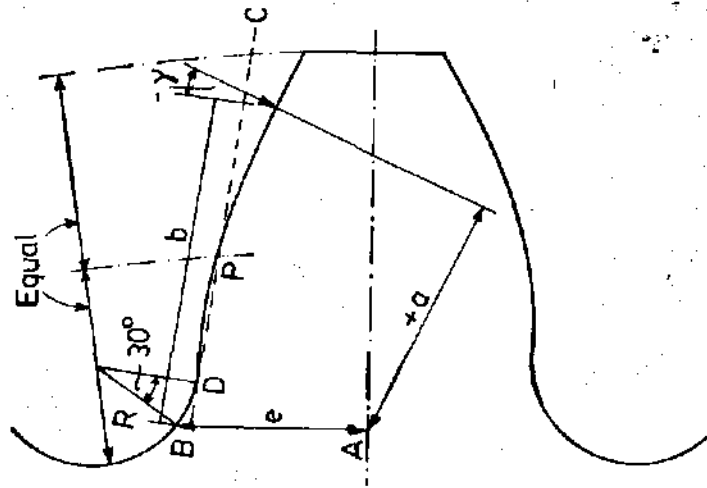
Equivalent Flat-Sided Projection Constructed from Gear Tooth.
